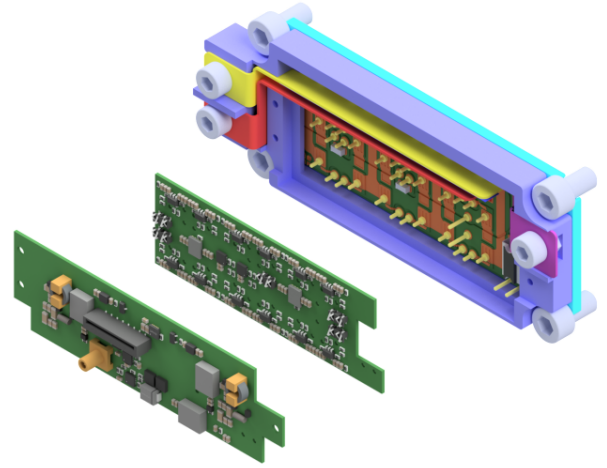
Exploded view of the PM with the two gate driver boards. Both PCBs are integrated into the housing.
